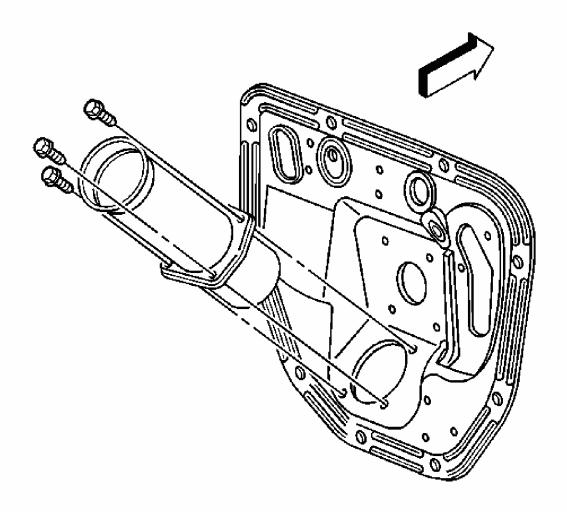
Locating Intermediate Shaft Seal Bolts Courtesy of GENERAL MOTORS CORP.
